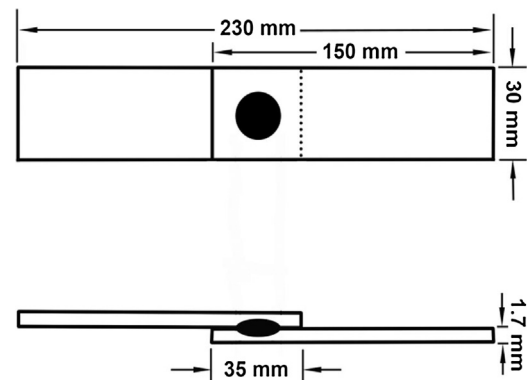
Geometry and dimensions of lap-shear tensile test specimens.
